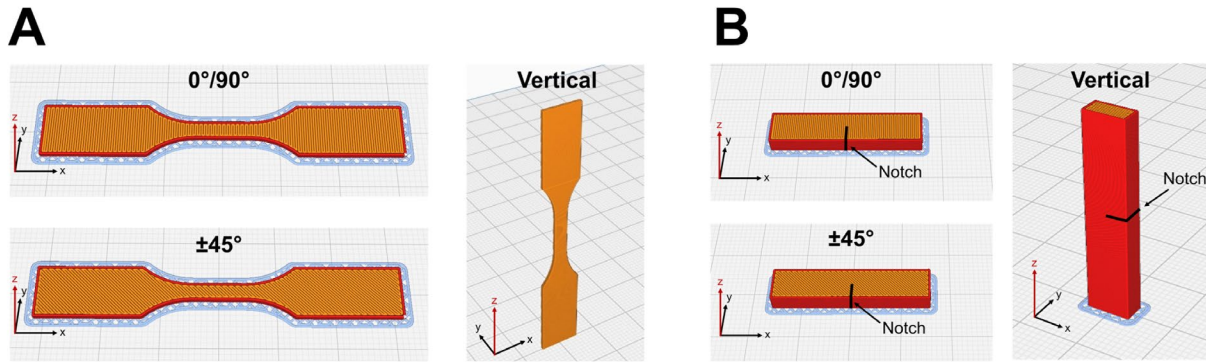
A) Three different printing configurations of tensile test specimens. B) Three different printing configurations of SENB specimens.
